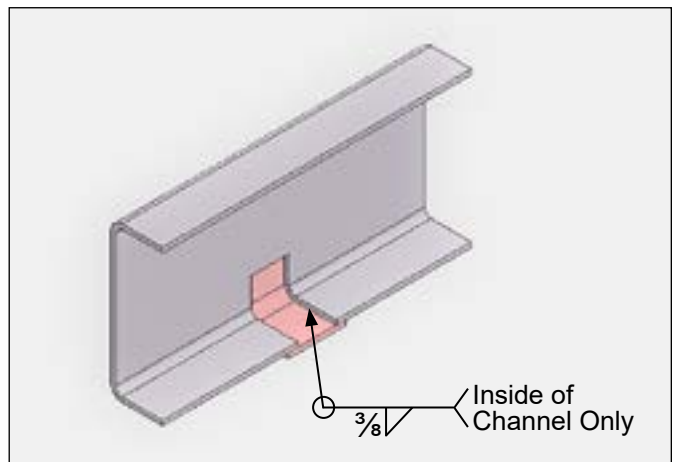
Installing Patch on Inside of Channel, Welding Around Outside of Patch
